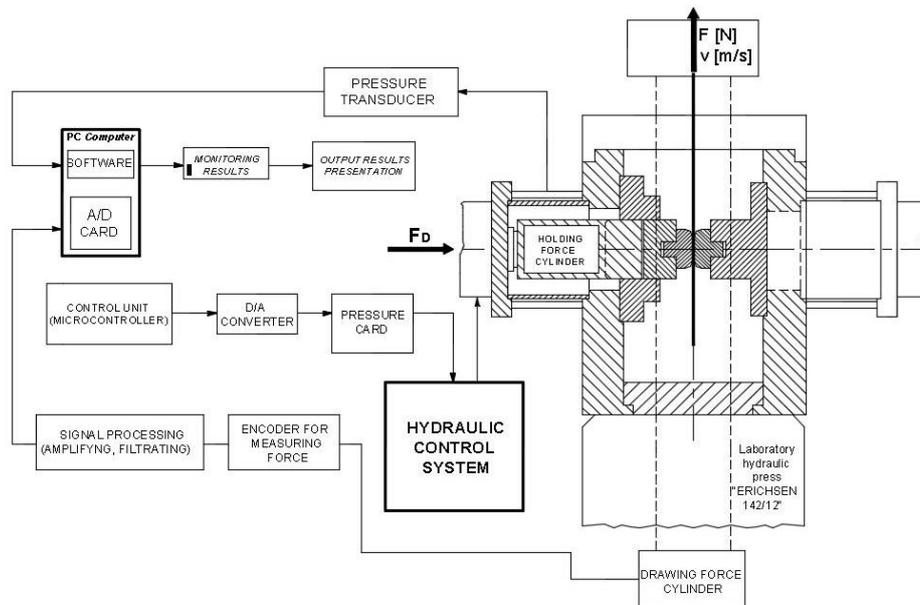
Schematics of sheet strip drawing device with flat contact surfaces
